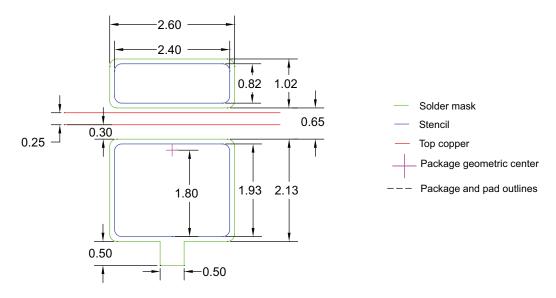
Recommended PCB solder pad layout for LUXEON 3535L Line.
